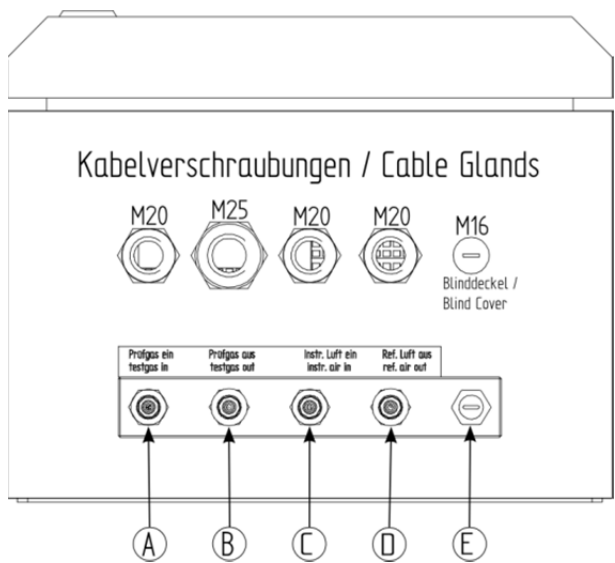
Bottom view of SME-53 with integrated pneumatic unit
